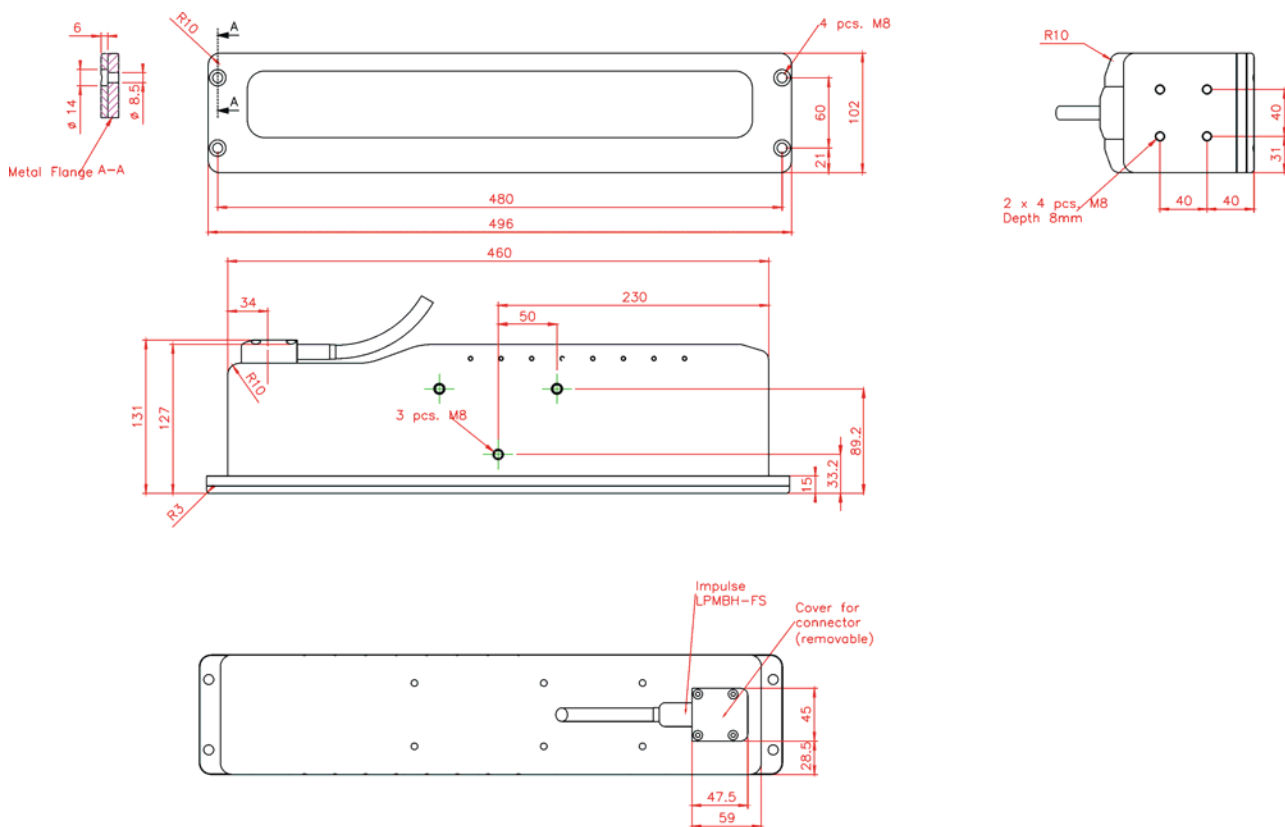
Outline Dimension Drawing of EM7200 Receiver Unit
